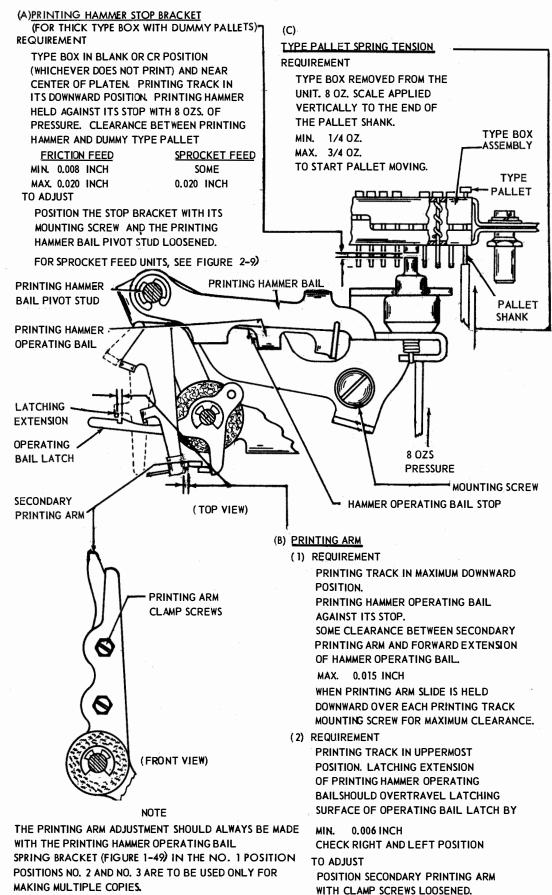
TYPING UNIT, PRINTING MECHANISM
